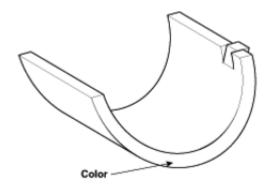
Identifying Color Courtesy of HYUNDAI MOTOR CO.
